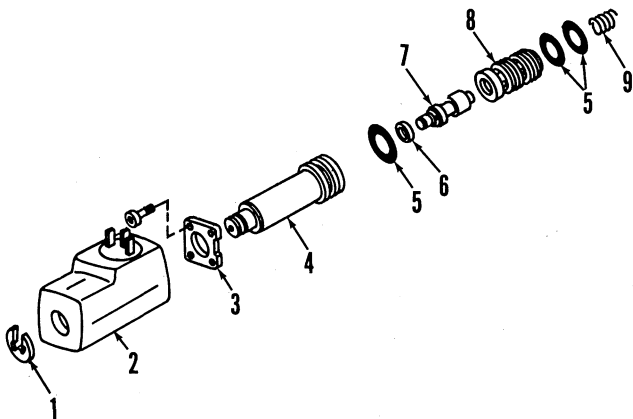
Exploded view of MFWD solenoid valve assembly used on early Power Shift tractors and all Quad-Range tractors.
